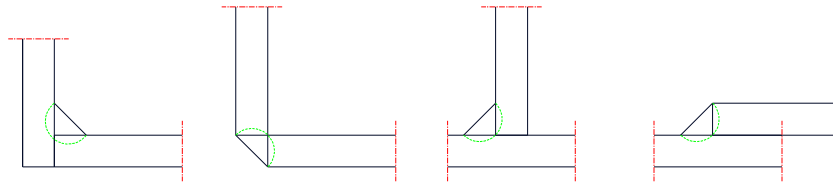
Single-fillet welded joints . (a)
